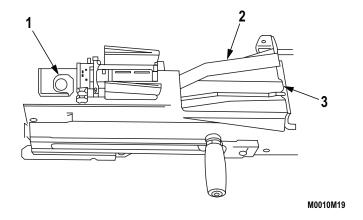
Primary Drive Lever and Vertical Cam Assembly Removal.
